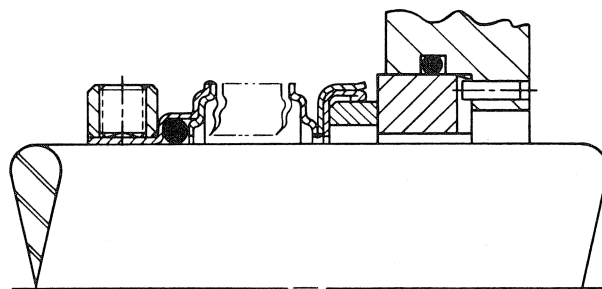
Typical Low Cost Welded Metal Bellows Seal.
